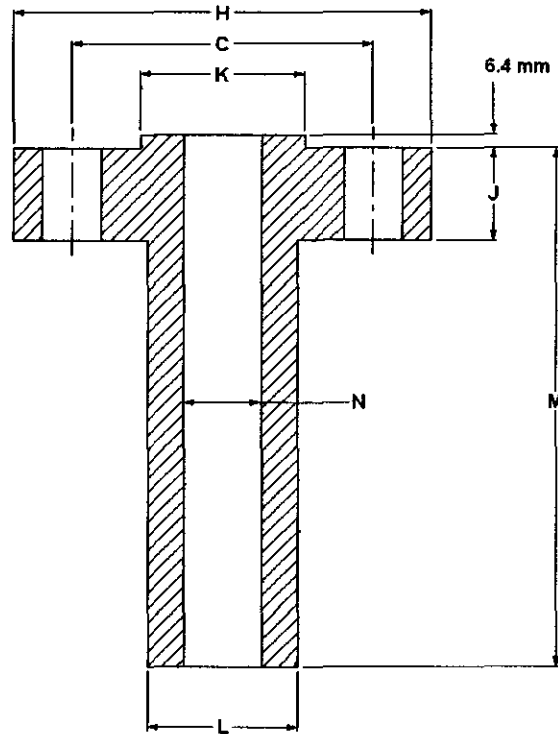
ASME B16.5 Class 2500 long welding neck flange (Appendix 7: drawing FL_LWN_DETAIL)
